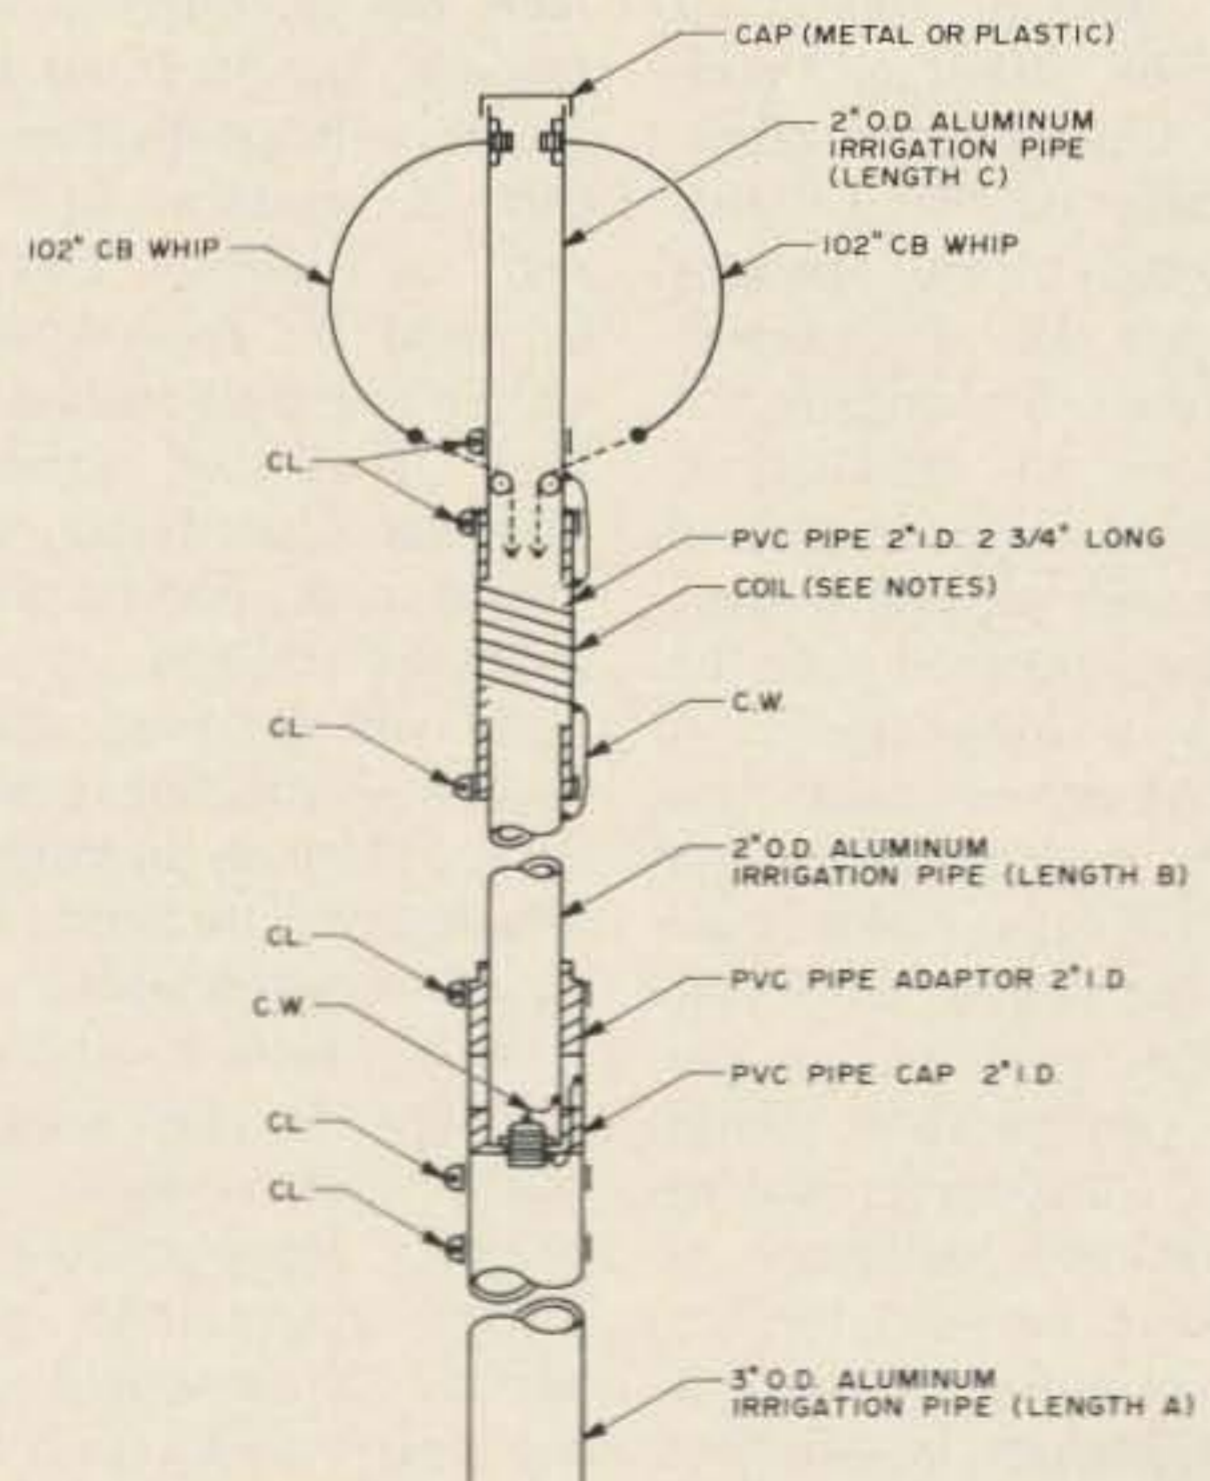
Antenna construction details. Notes: C.W. — connecting wire to solder lugs; CL. — radiator hose clamp; Coil — Polycoil 2 1/2" diameter #16, 10 turns per inch.
